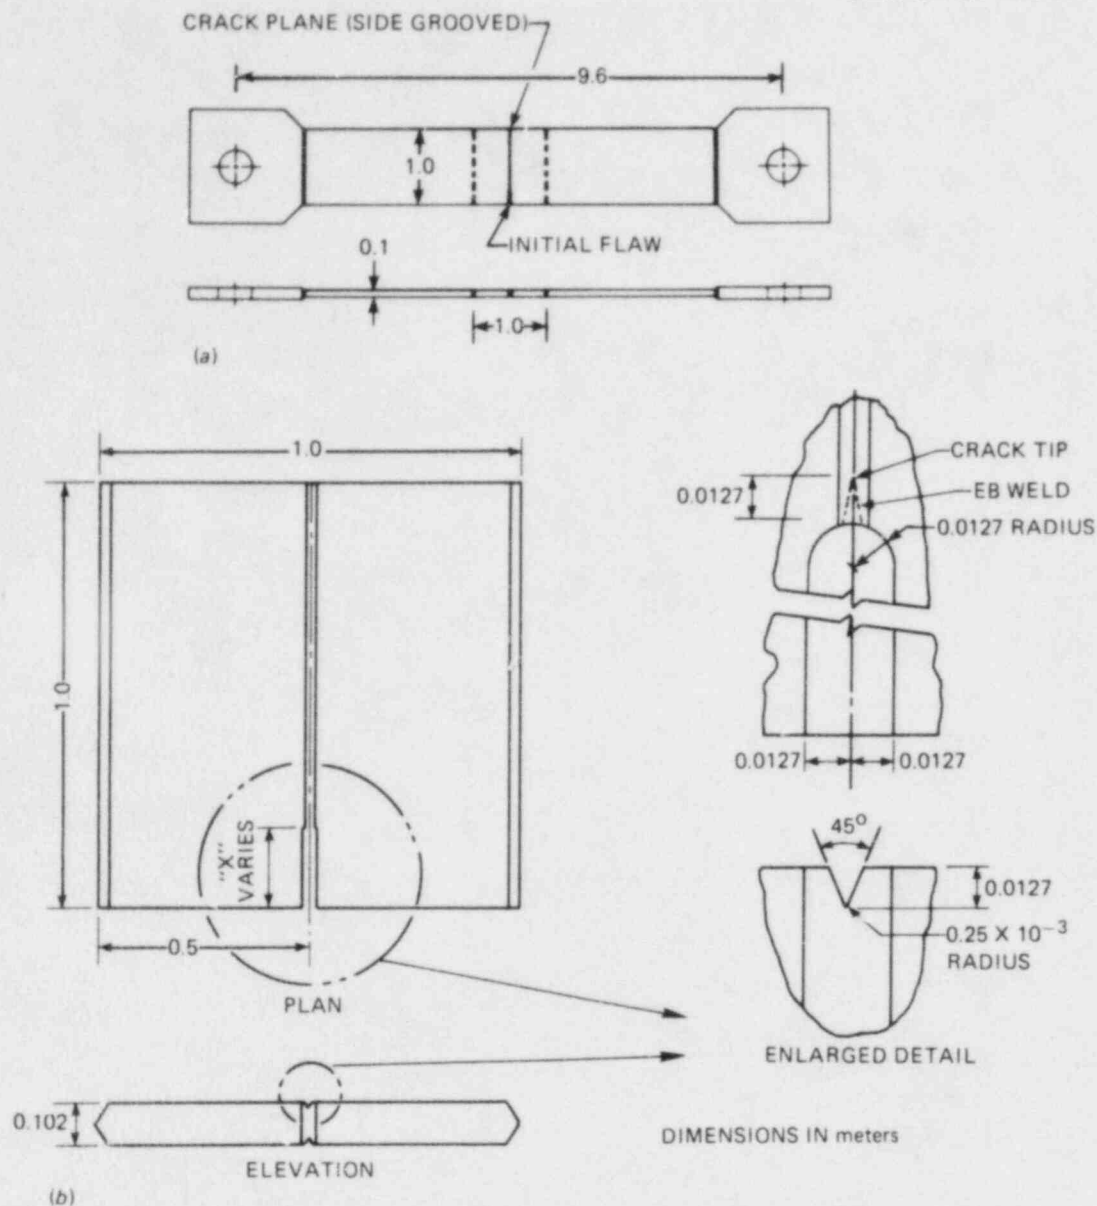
Wide-plate crack-arrest specimen and pull-plate assembly. (a) Schematic of assembly, (b) detail of test specimen.
